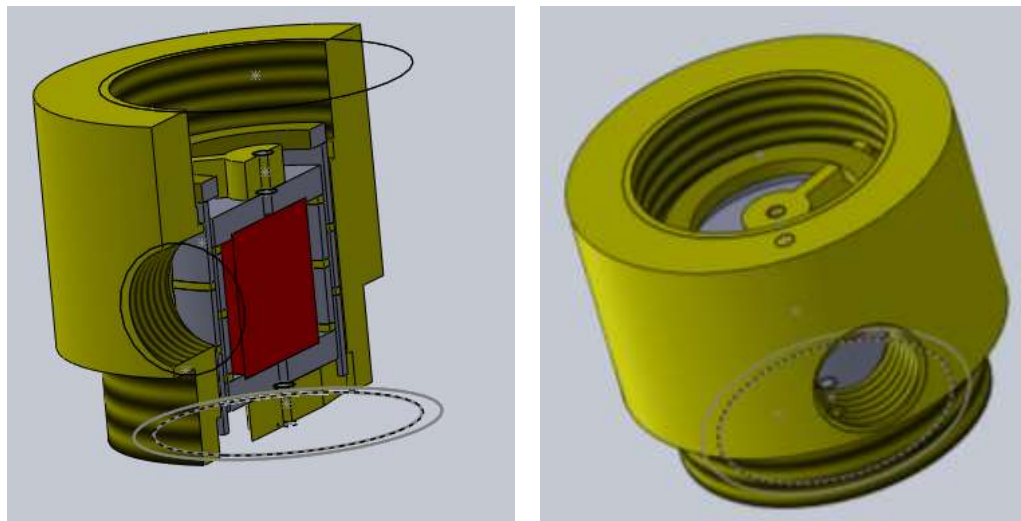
Drawing of the redesigned Zebra valve concept for mountain bikes.
